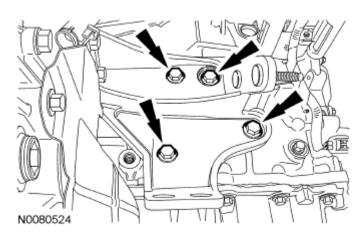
Locating PTU Bracket-To-Engine Bolt Courtesy of FORD MOTOR CO.
